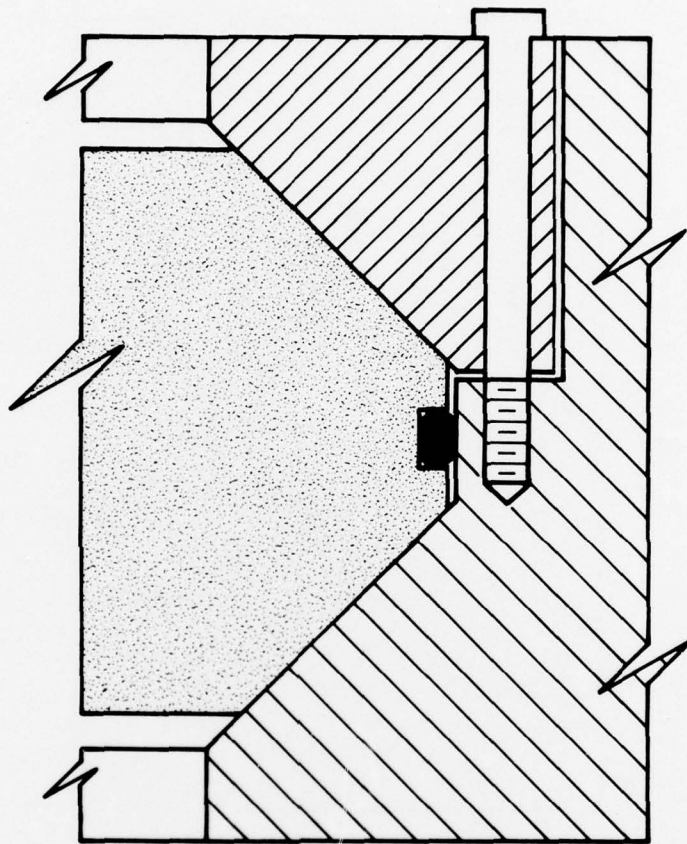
Sealing arrangement for twin-beveled discs using a radially compressed O-ring located in a groove on the cylindrical surface of the window. This design is only marginally acceptable, as the deep O-ring groove will initiate cracks if the window is accidentally overpressurized in service.
